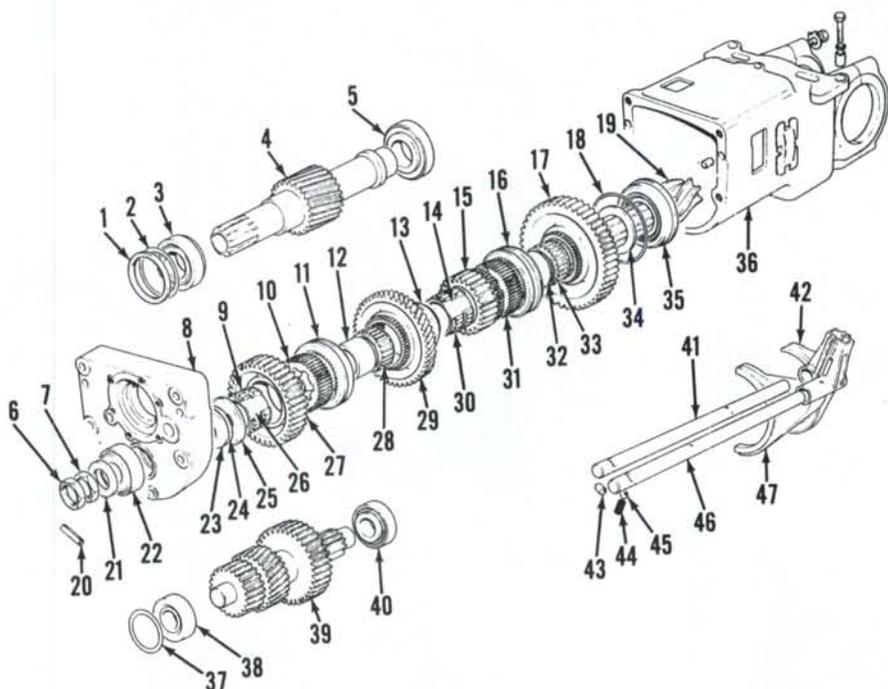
Exploded view of power shift range transmission showing component parts and their relative positions.
